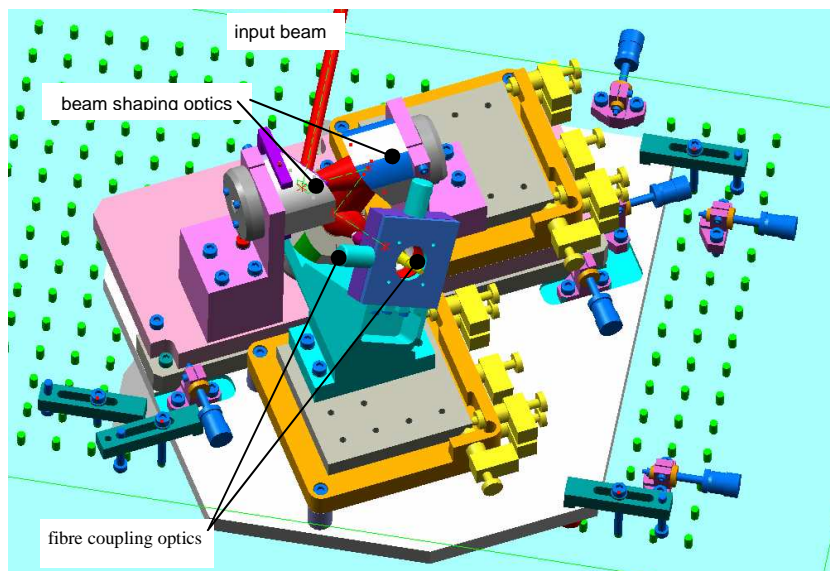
Mechanical design of the Proof-Of-Concept Demonstrator core
